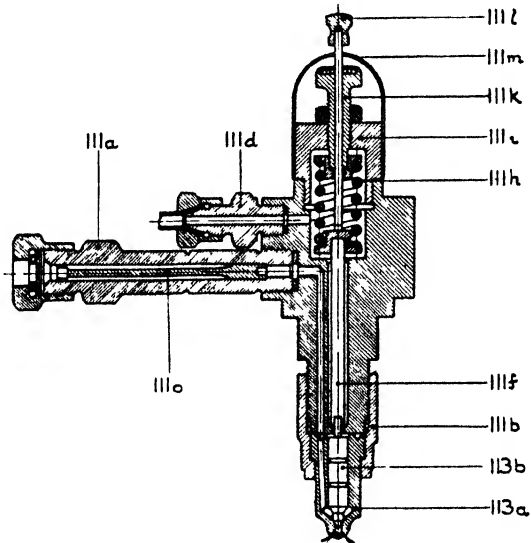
Sectional View of C.A.V.-Bosch Nozzle Holder with Multi-hole Nozzle.
